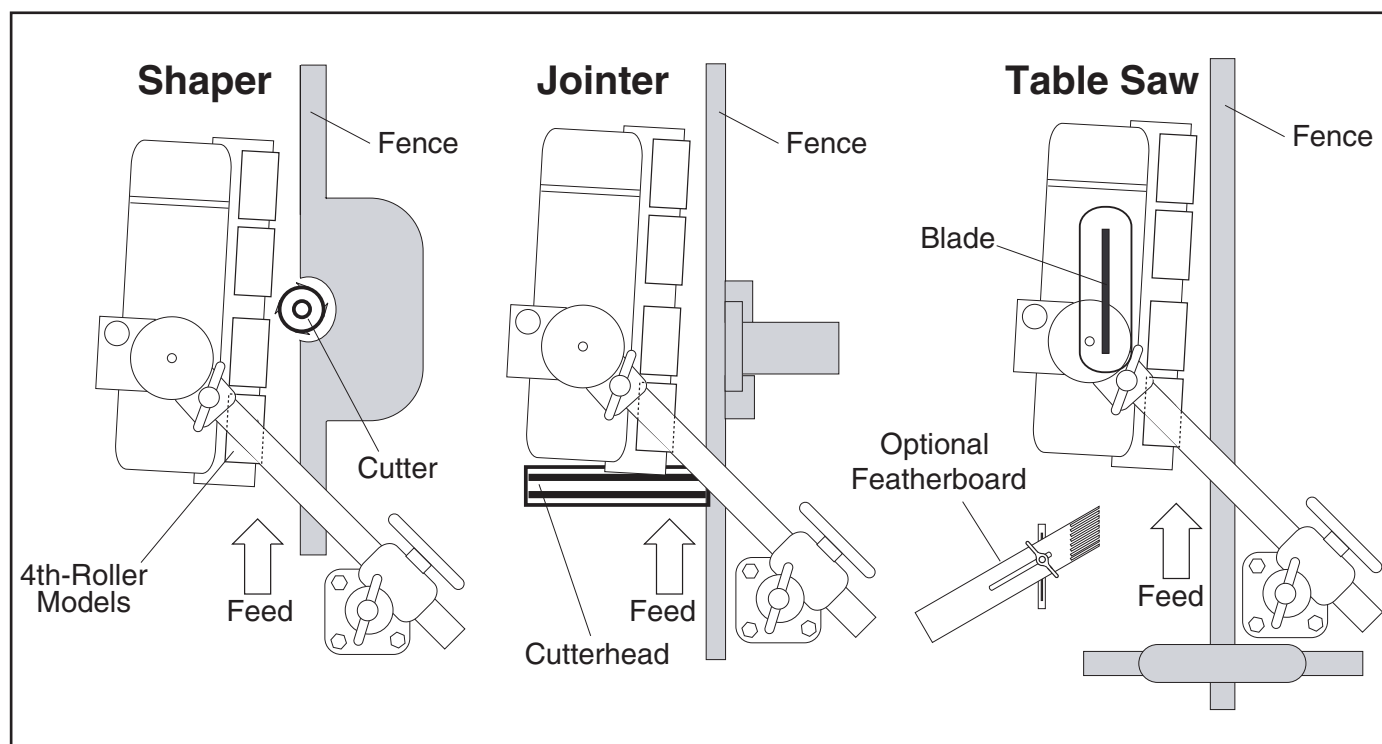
Typical power feed mounting on a shaper, jointer, and table saw.
